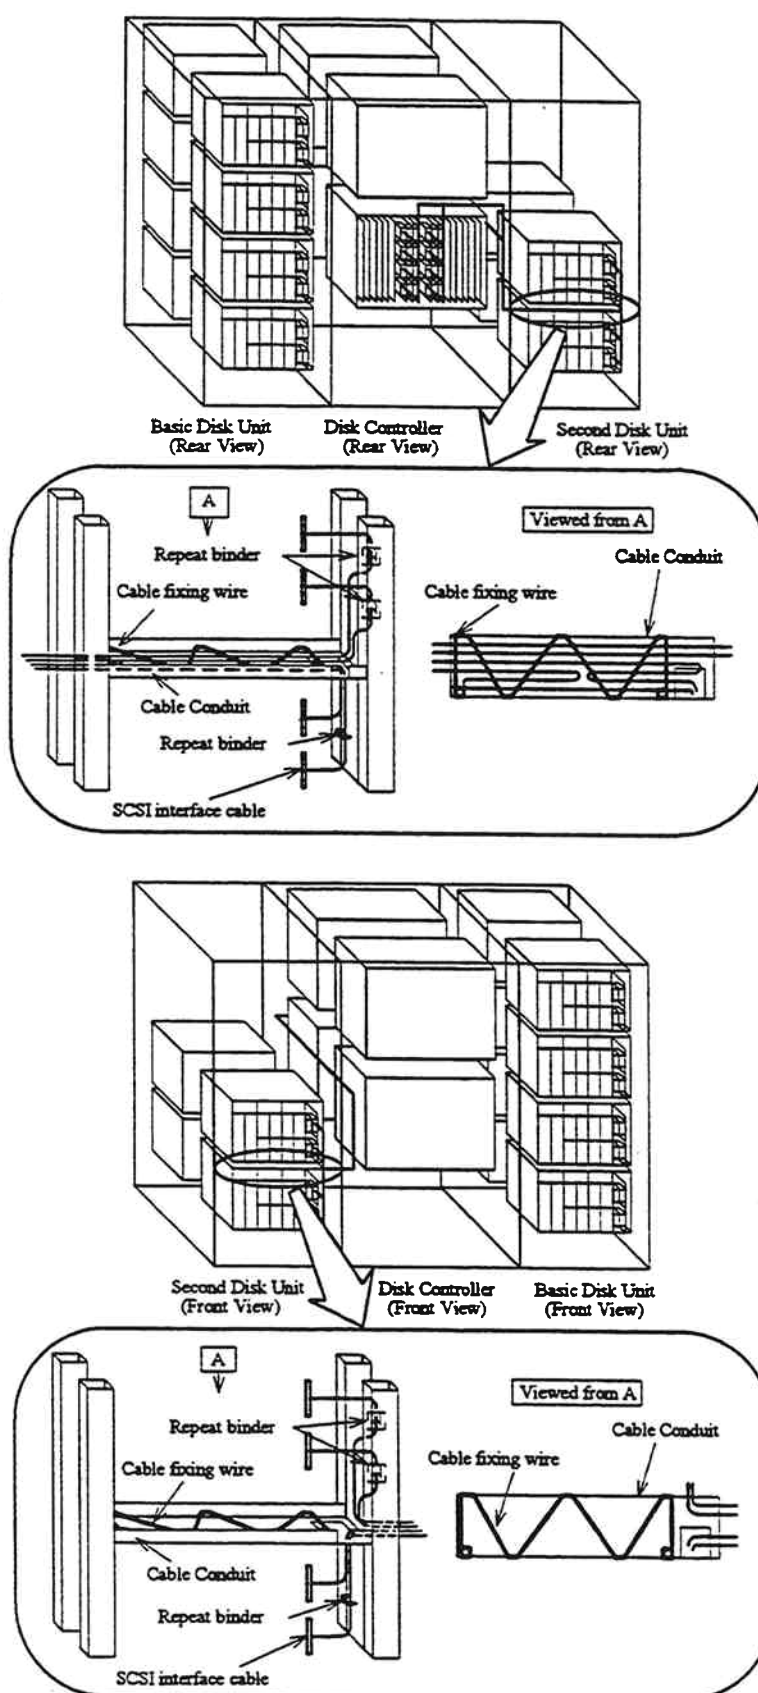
Removal of the cable fixing wire and repeat binder
